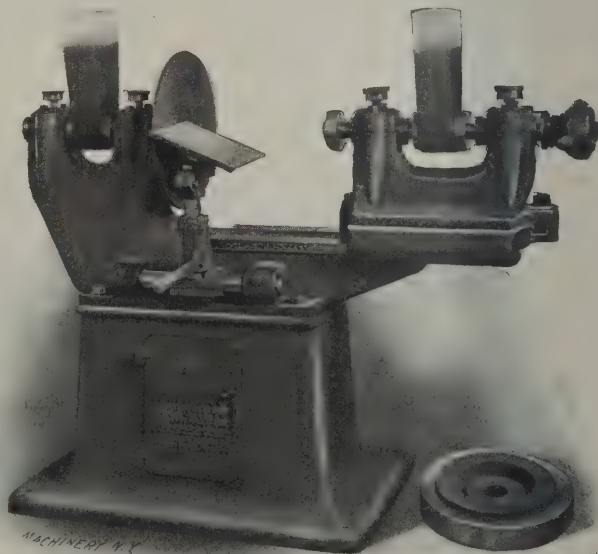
Gorton Double Disk Grinder used as a Single Head Grinder.
